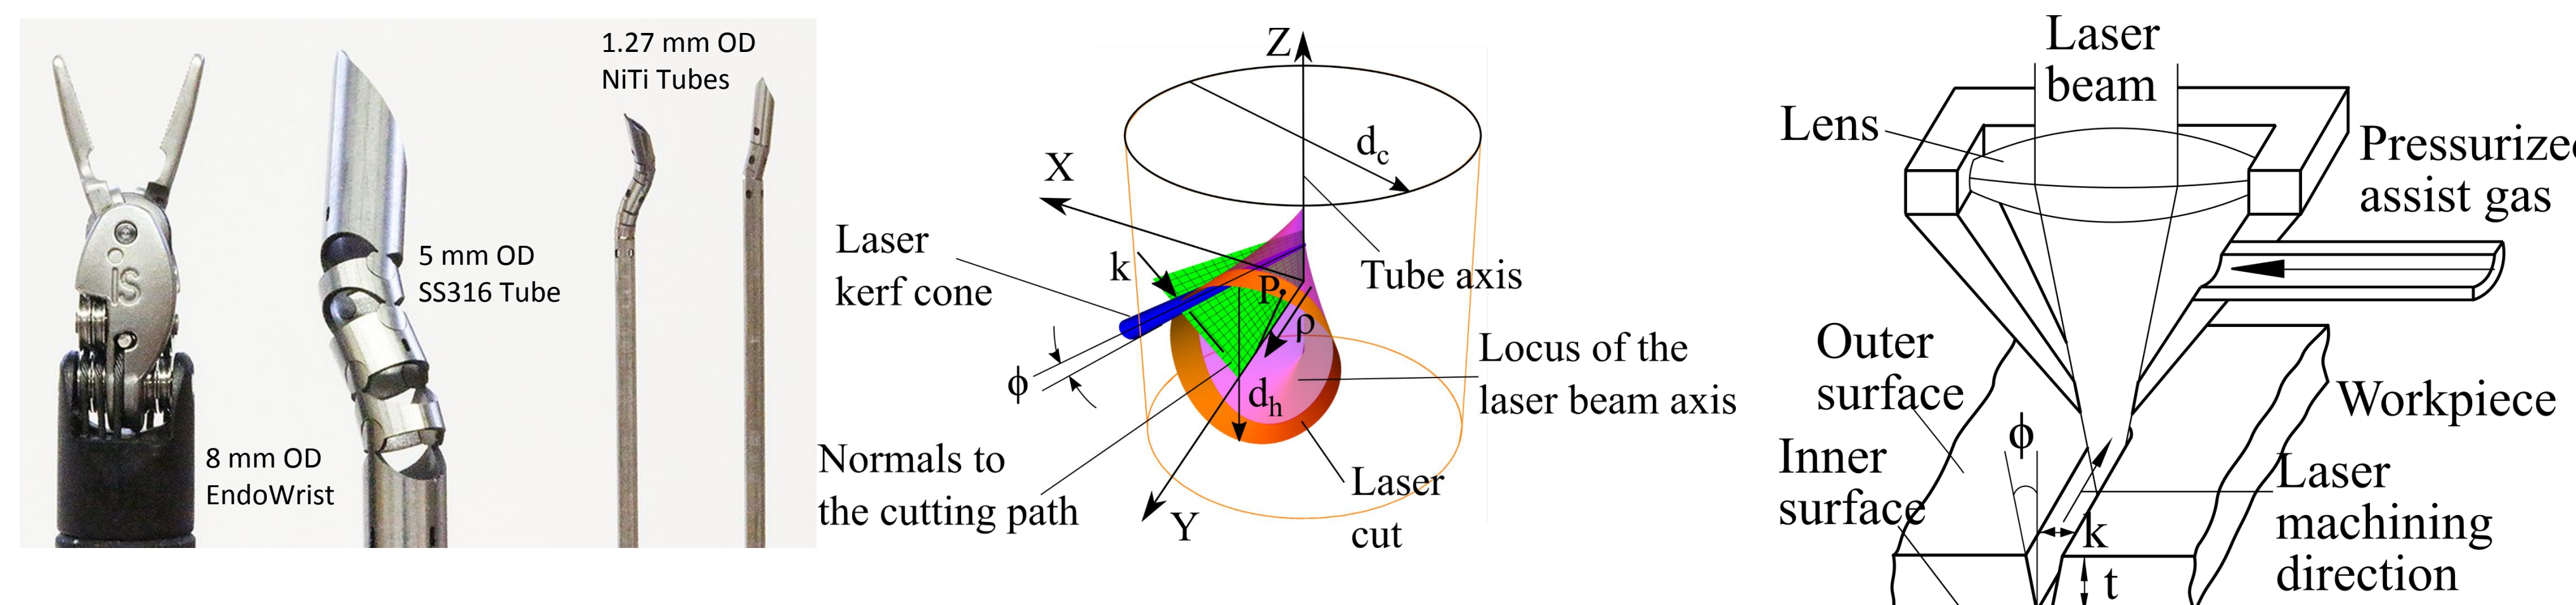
Laser machined prototypes contrasted against the da-Vinci EndoWrist (Left), geometric model for the laser machined hinge segment to describe the region of interference, and the laser machining process whose effects can be approximated using a kerf width and a kerf angle.
